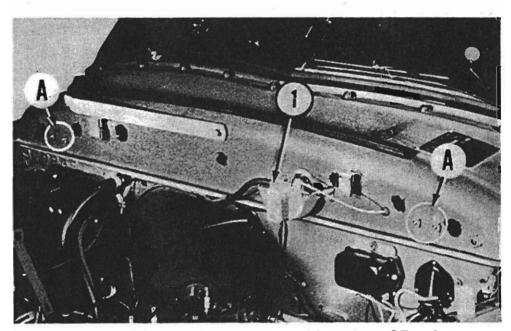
Windshield Wiper Motor and Location of Tensioners On Inside of Dash as Indicated by Circles.
